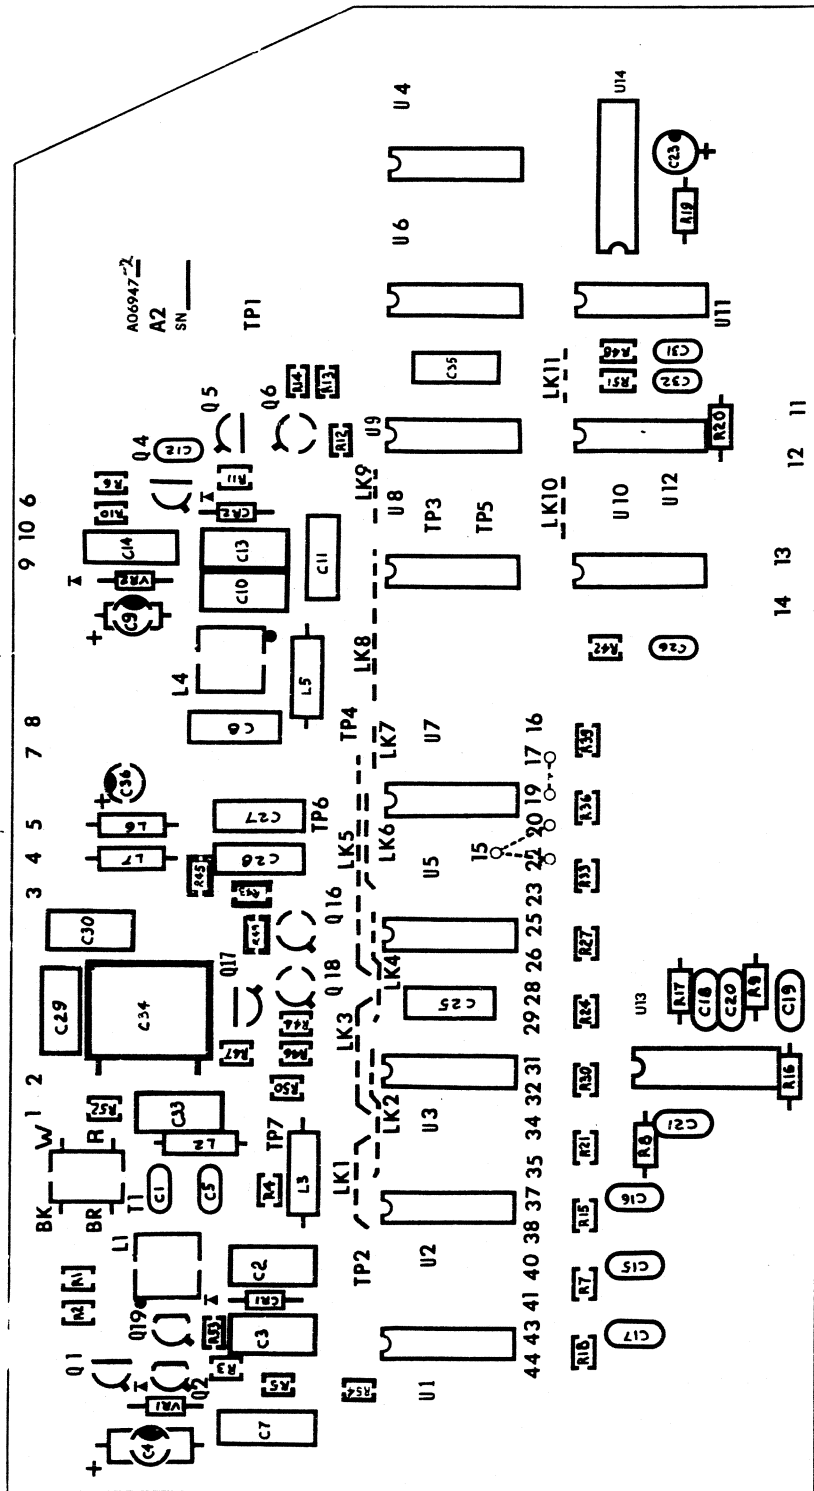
B. Upper Loop BFO Synthesizer A23A2 Circuit Card Assembly
